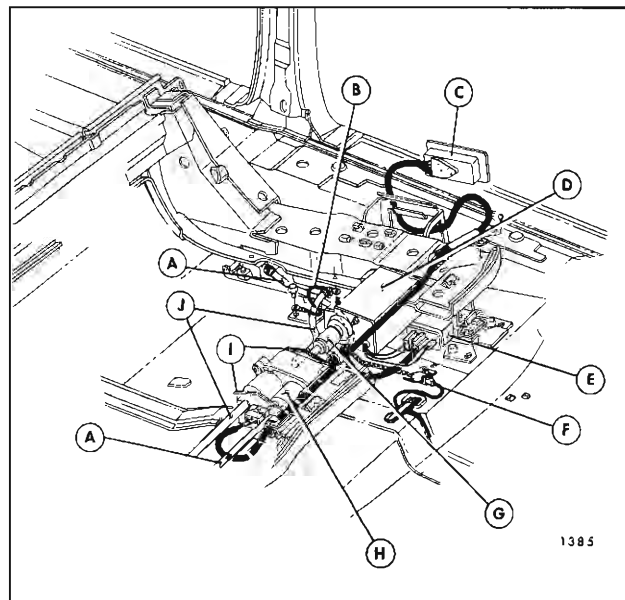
H5—Four-Way Full-Width Seat Electric Wiring
